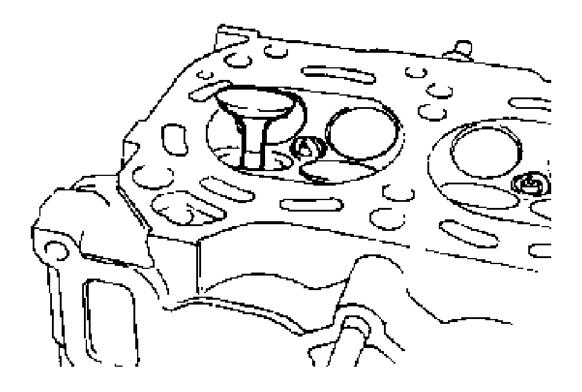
Installing Valve To Valve Guide Courtesy of SUZUKI OF AMERICA CORP.
